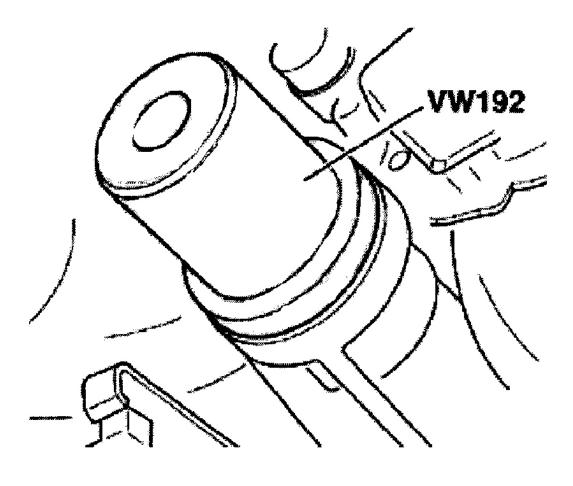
Pulling Out Drive Flange (Right Side - Up To December, 19955) Courtesy of VOLKSWAGEN UNITED STATES, INC.
